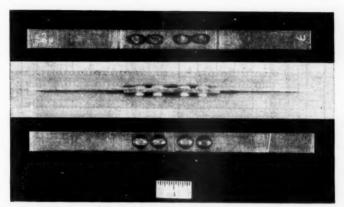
Type of Riveted Specimen Cut From Aluminum Alloy Sheet, 0.064 in. Thick.
